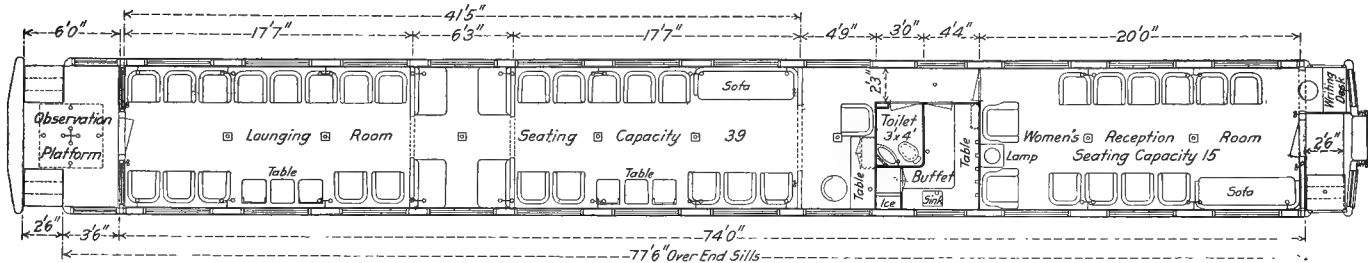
Floor Plan of Chicago, Burlington & Quincy Parlor Car with Reception Room for Women.
